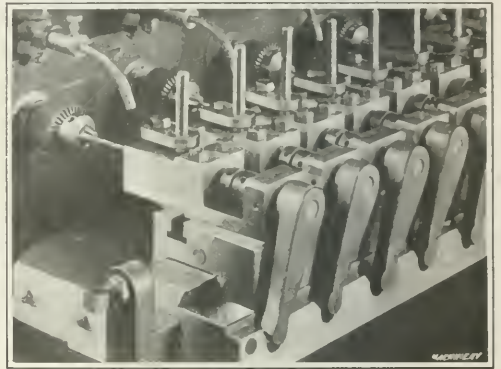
Close View of Drill Spindles and Fixtures of National-Acme Six-spindle Drilling Machine
